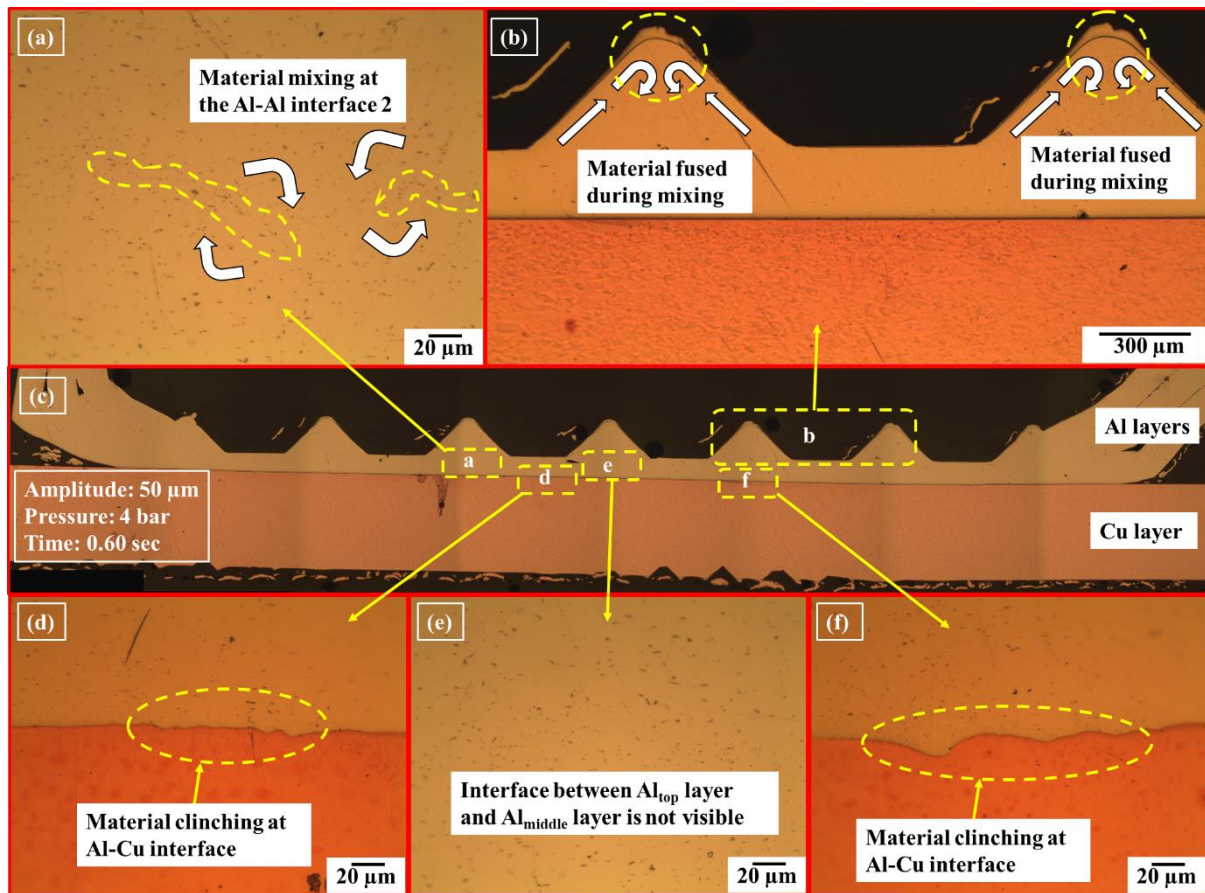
Optical micrograph of a typical over-weld elucidating the welding mechanism.
